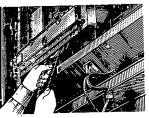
ARRANGEMENT OF HOISTING CABLE IN GUIDING TUBES OF KA4-388 BOMB RACK
